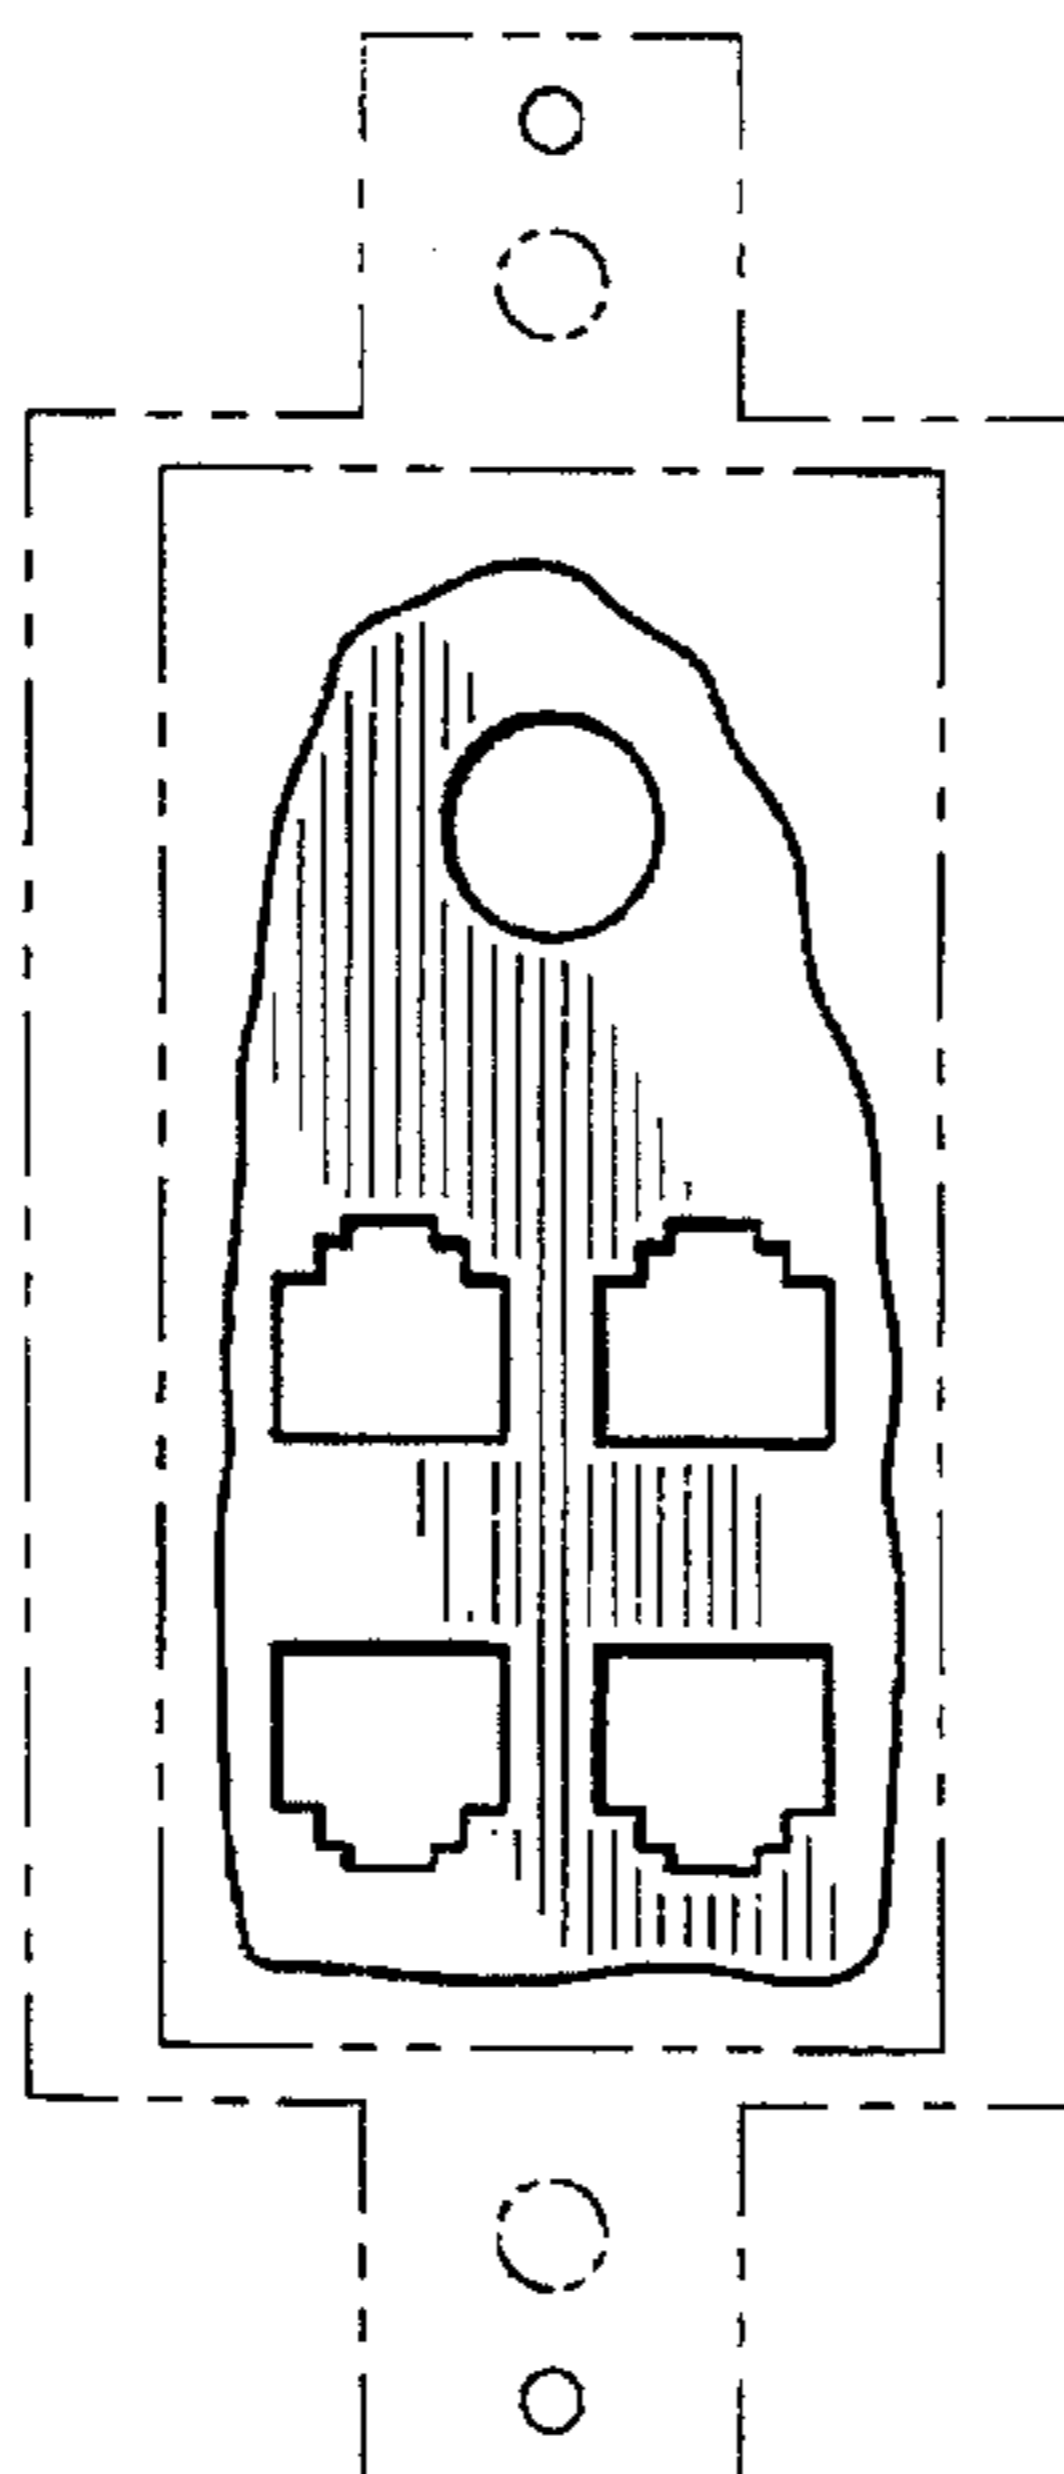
is a front elevational view of the decorative mounting plate of FIG. 1 mounted in a conventional single-gang face plate.
